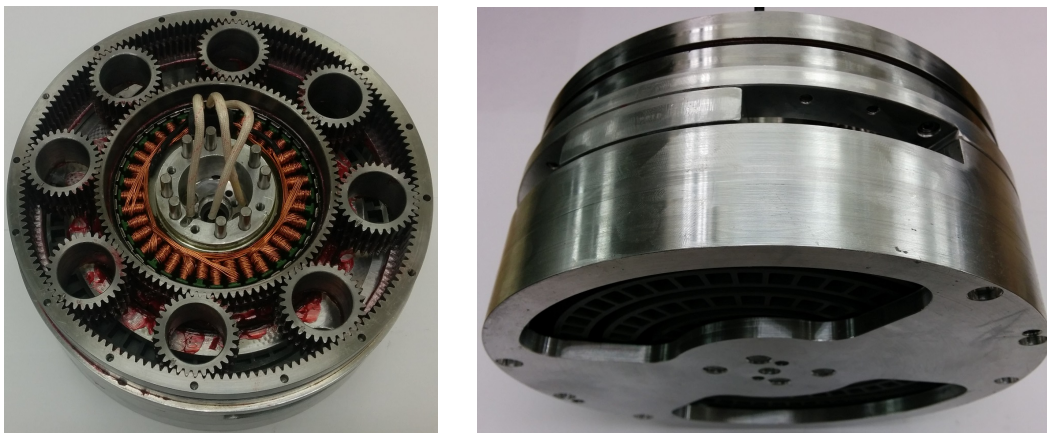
Bearingless series elastic actuator prototype. Fig. 6.6 shows the actuator schematic structure.
